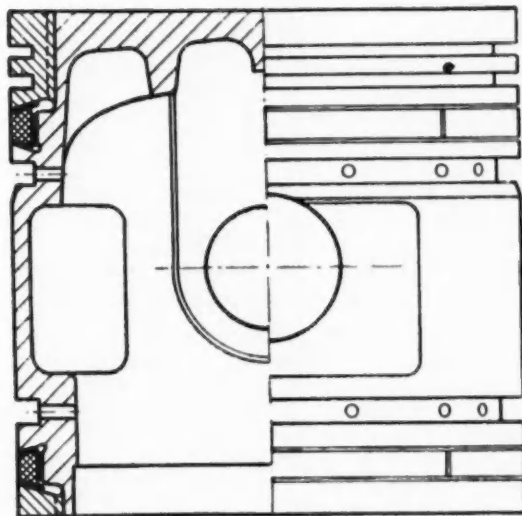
Side view of piston used in the tests, with one-half shown in section.
